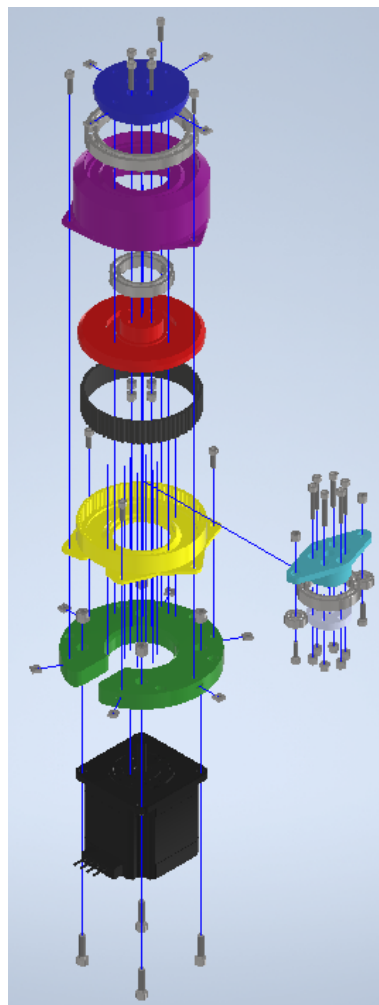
Exploded view of a NEMA23 harmonic drive
